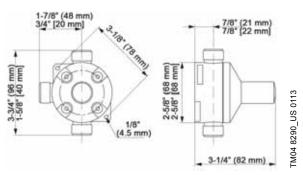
Pressure relief valve. Dimensions in brackets apply to stainless-steel version.
